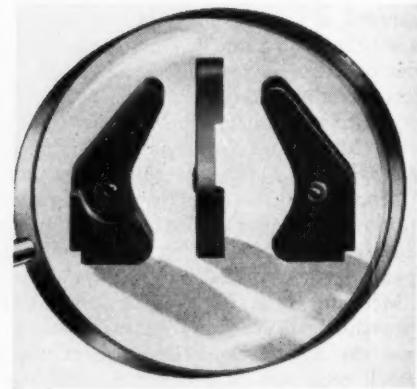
Close-up of both sides of shutter-tripper flywheel for camera
